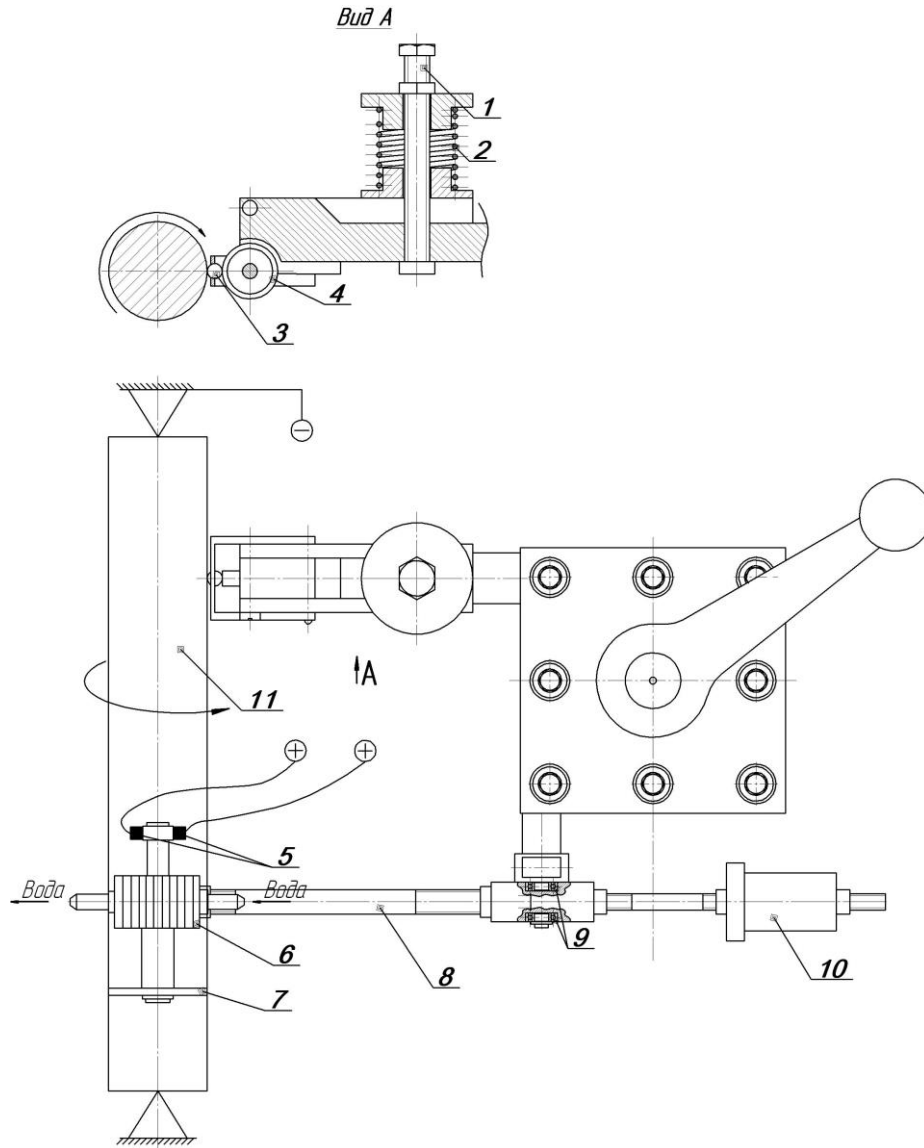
Apparatus for forming a combined wear-resistant coating on the shaft, *authors'*: 1 - the adjusting screw; 2 - spring; 3 - ball; 4 - bearing; 5 - graphite brushes; 6 - radiator; 7 - electrode; 8 - pole; 9 - bearings; 10 - counterbalance; 11 - detail, processed (shaft) / *Схема установки для формування комбінованого зносостійкого покриття на валах, авторська розробка: 1 - регульовальний гвинт; 2 – пружина; 3 – кулька; 4 – підшипник; 5 - графітові щітки; 6 – радіатор; 7 – електрод; 8 – штанга; 9 – підшипники; 10 – проти-вага; 11 – деталь, що оброблюється (вал)
